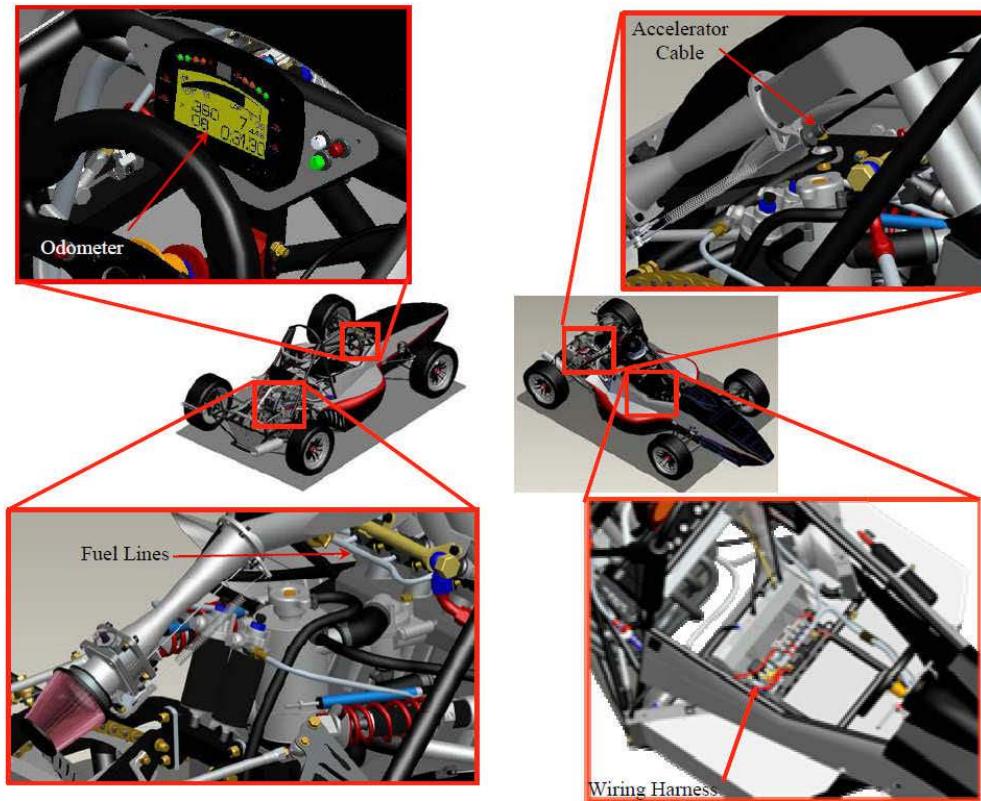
Small components to be removed: (a) Odometer, (b) Accelerator cable, (c) Fuel lines, and (d) Wiring harness.
